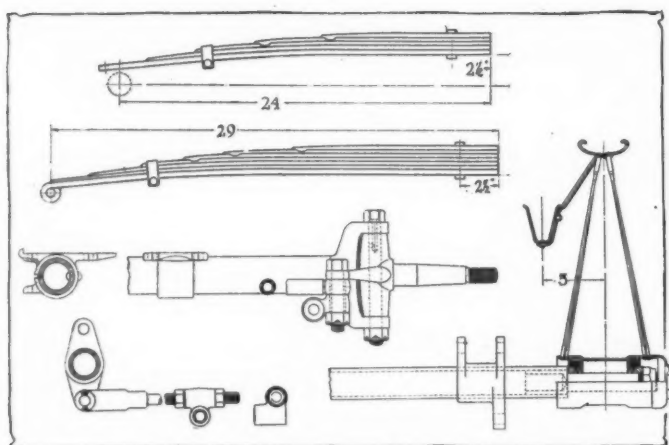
Bicar cycle parts. Top—Quarter elliptic springs. Middle—Front axle construction. Bottom—Radius rod design. Right—Rear axle and wire wheel construction
